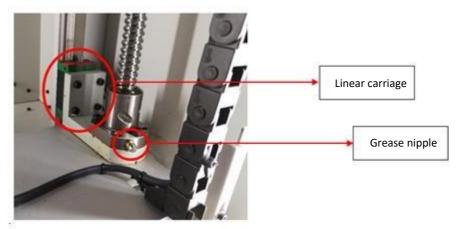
Ball screws and guide rails manufactured by HIWIN
